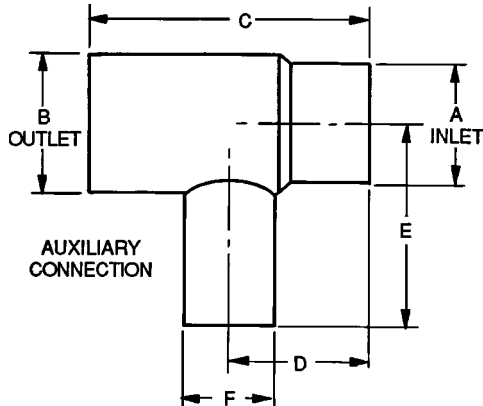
Distributor and Hot Gas Bypass Auxiliary Side Connector
